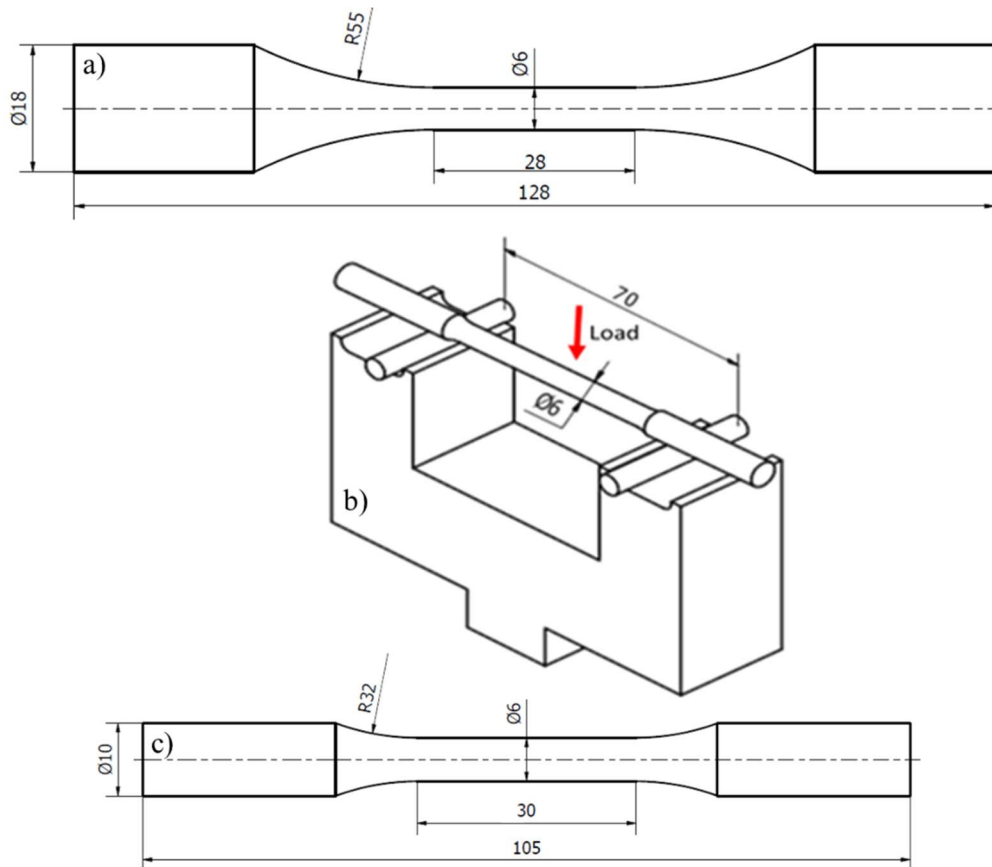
a) Geometry of the tensile test specimens; b) 3PB testing apparatus; c) Geometry of 3PB tests specimens. (Dimensions in mm).
